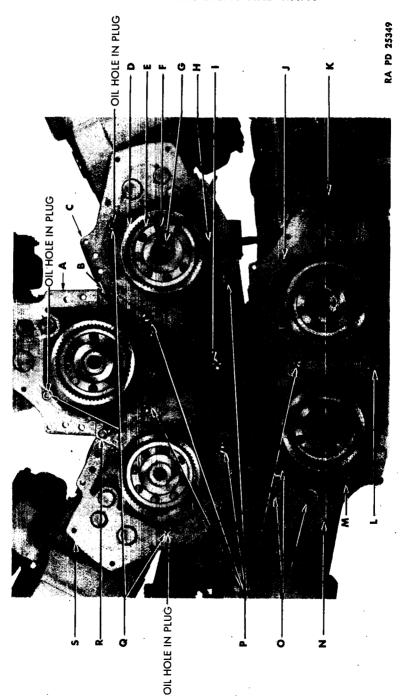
Radiator End Of Power Unit Less Drive Gear Housing
